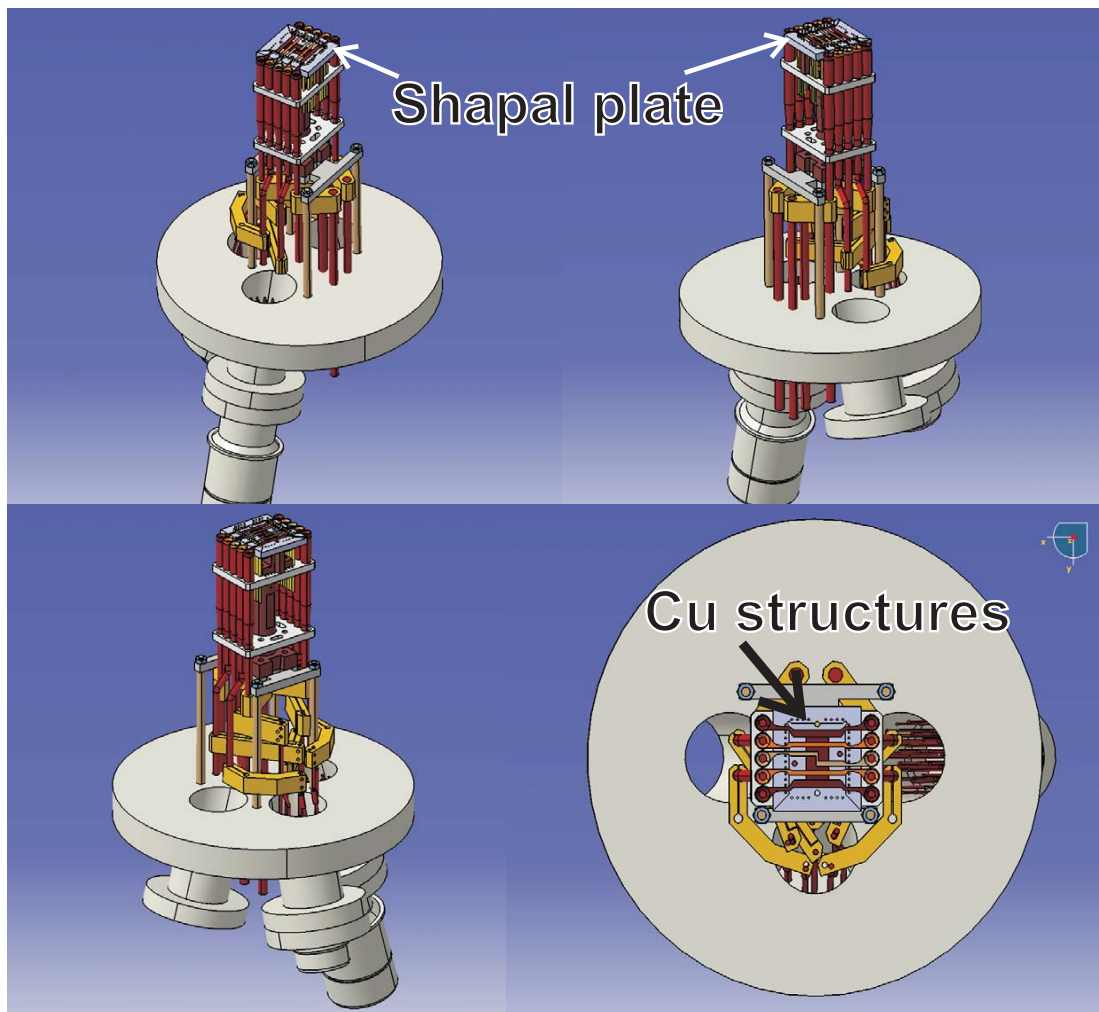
Overview of the complete chip mounting. The technical drawings of the parts marked here will be given in this chapter.
